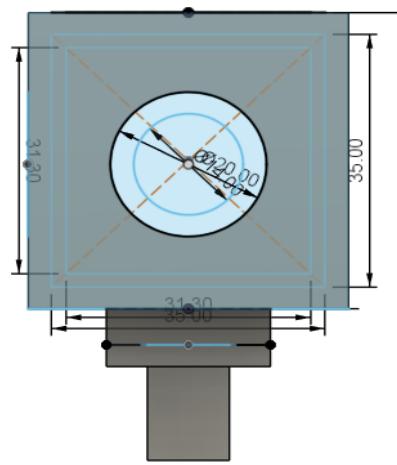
10 TOP VIEW OF THE LASER MODULE HOLDER BRACKET
